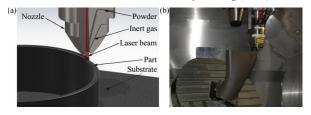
(a) CLAD nozzle; (b) Example of part made by ALM process
